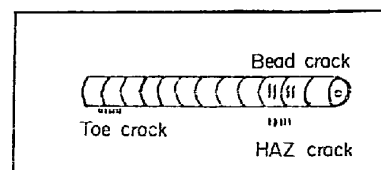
Schematic representation for the appearance of cracks which occur in the specimen after testing.
